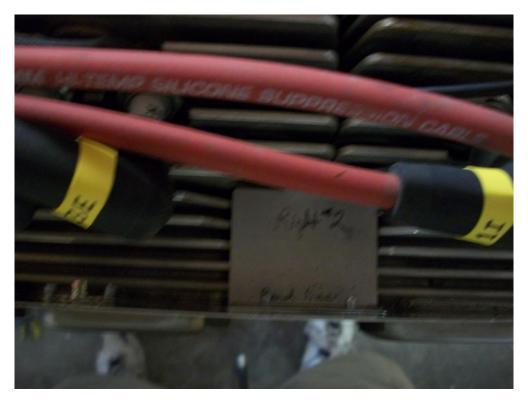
Small air dams were placed between the cylinder heads where the oil galleys connect to the heads so as to block any air exit about these 1 inch sized holes. All air goes through the cylinder fins. The metal sheet makes it very easy to attach and adjust these vanes and gap seals.
